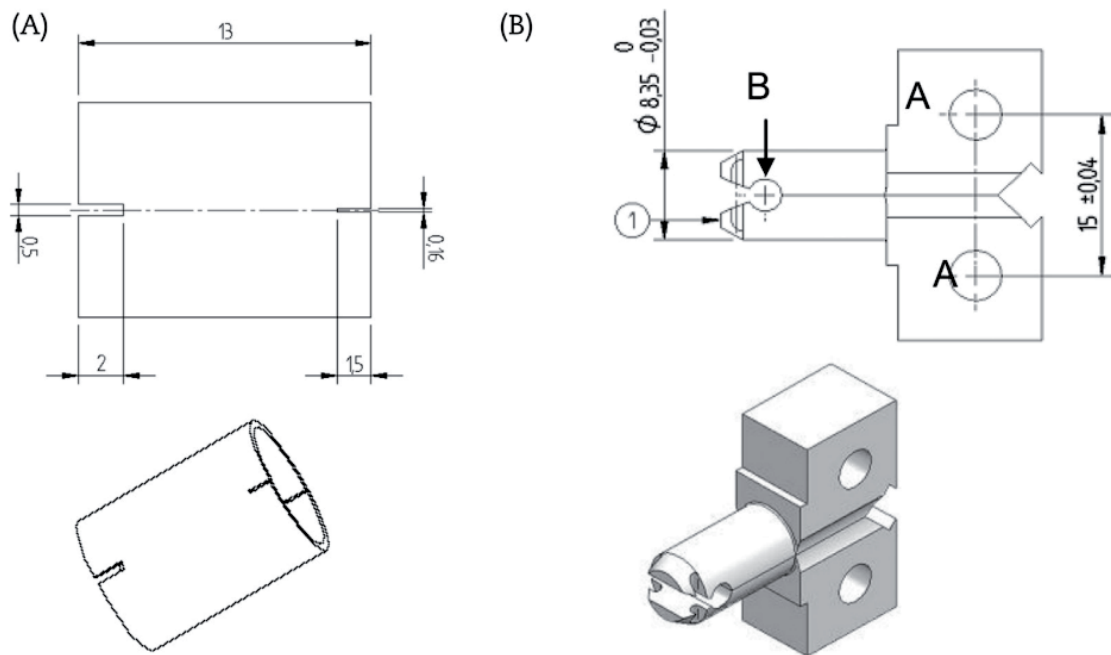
A typical pin-loading tension (PLT) experiment. A) shows the PLT specimen and B) the fixture.
